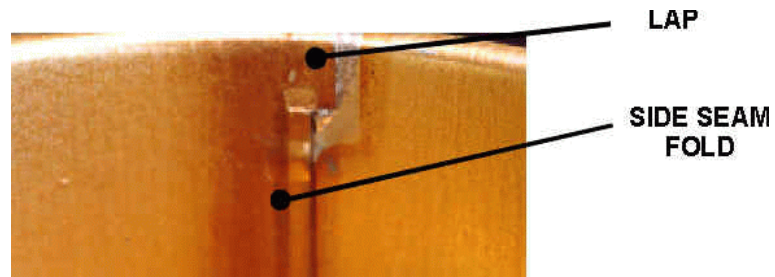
a - Three Piece Can - Soldered Side Seam - Closed Can
